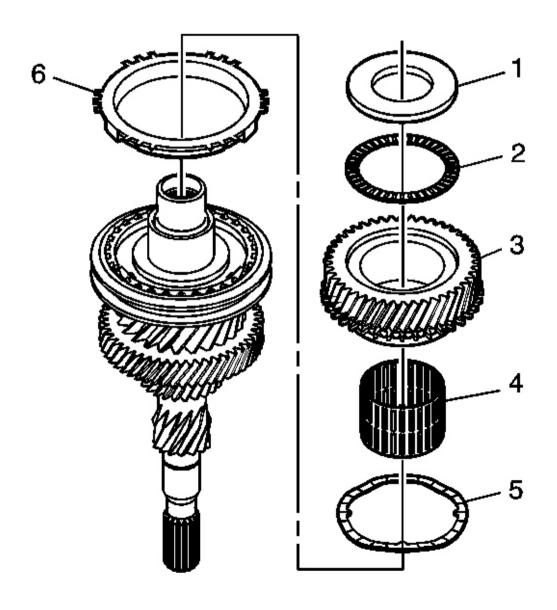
Removing Caged Needle Bearings Courtesy of GENERAL MOTORS CORP.
